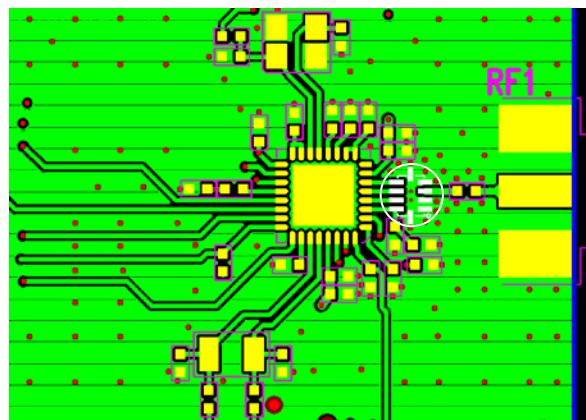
EVAL-ADF7023DB5Z Board Layout Highlighting the Integrated Passive Device Location
